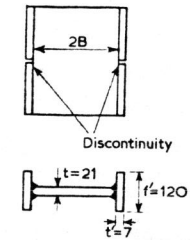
Longitudinally welded I-type test specimen.
